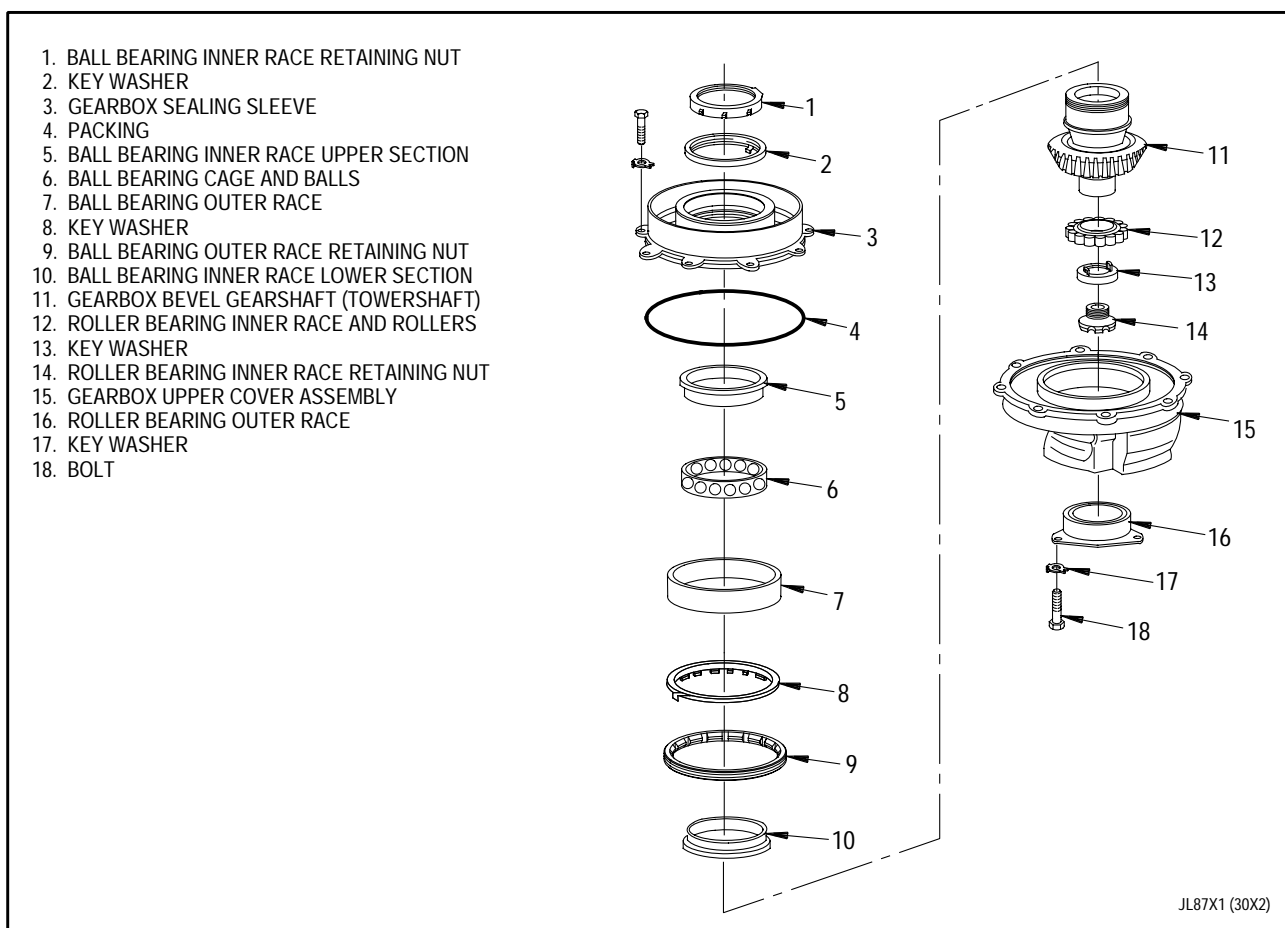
Gearbox Bevel Gearshaft Assembly - Disassembly
